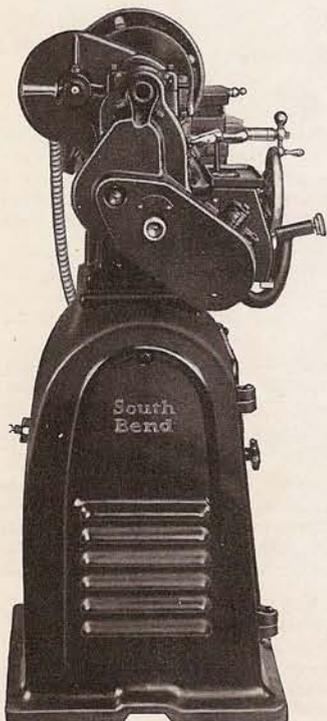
End view of Underneath Belt Motor Driven Lathe, showing removable ventilated end plate
